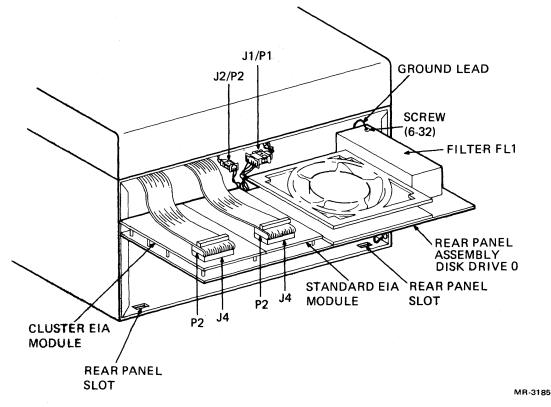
Rear Panel Assembly, Removal and Replacement
